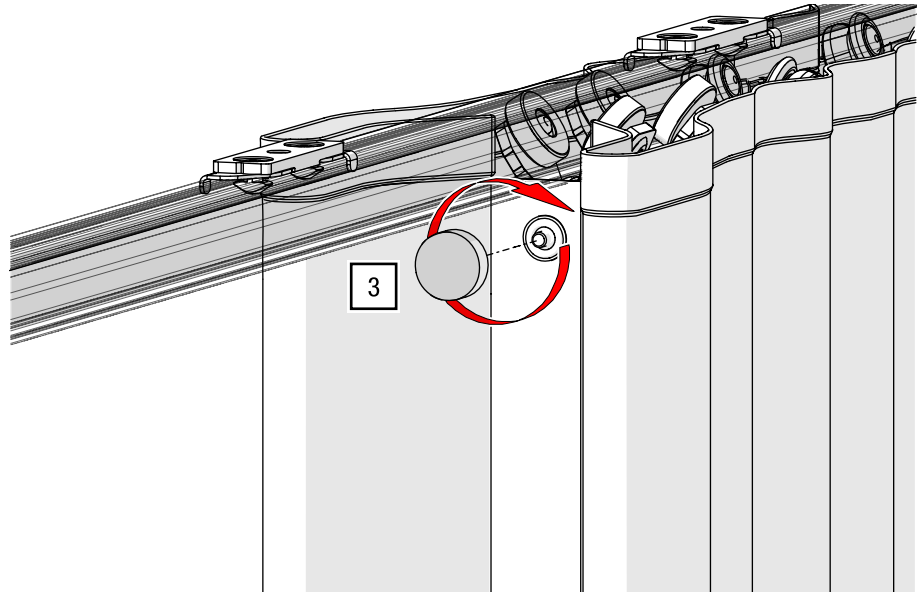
Master runner with double overlap arm – Mount coupling magnet (1/2)
